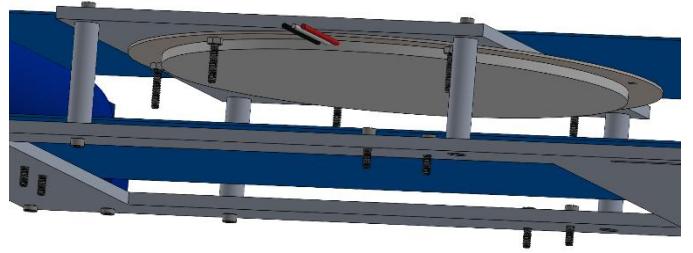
SolidWorks rendering of the fully-assembled printer modification assembly, zoomed in on the underside of the hot plate assembly.
